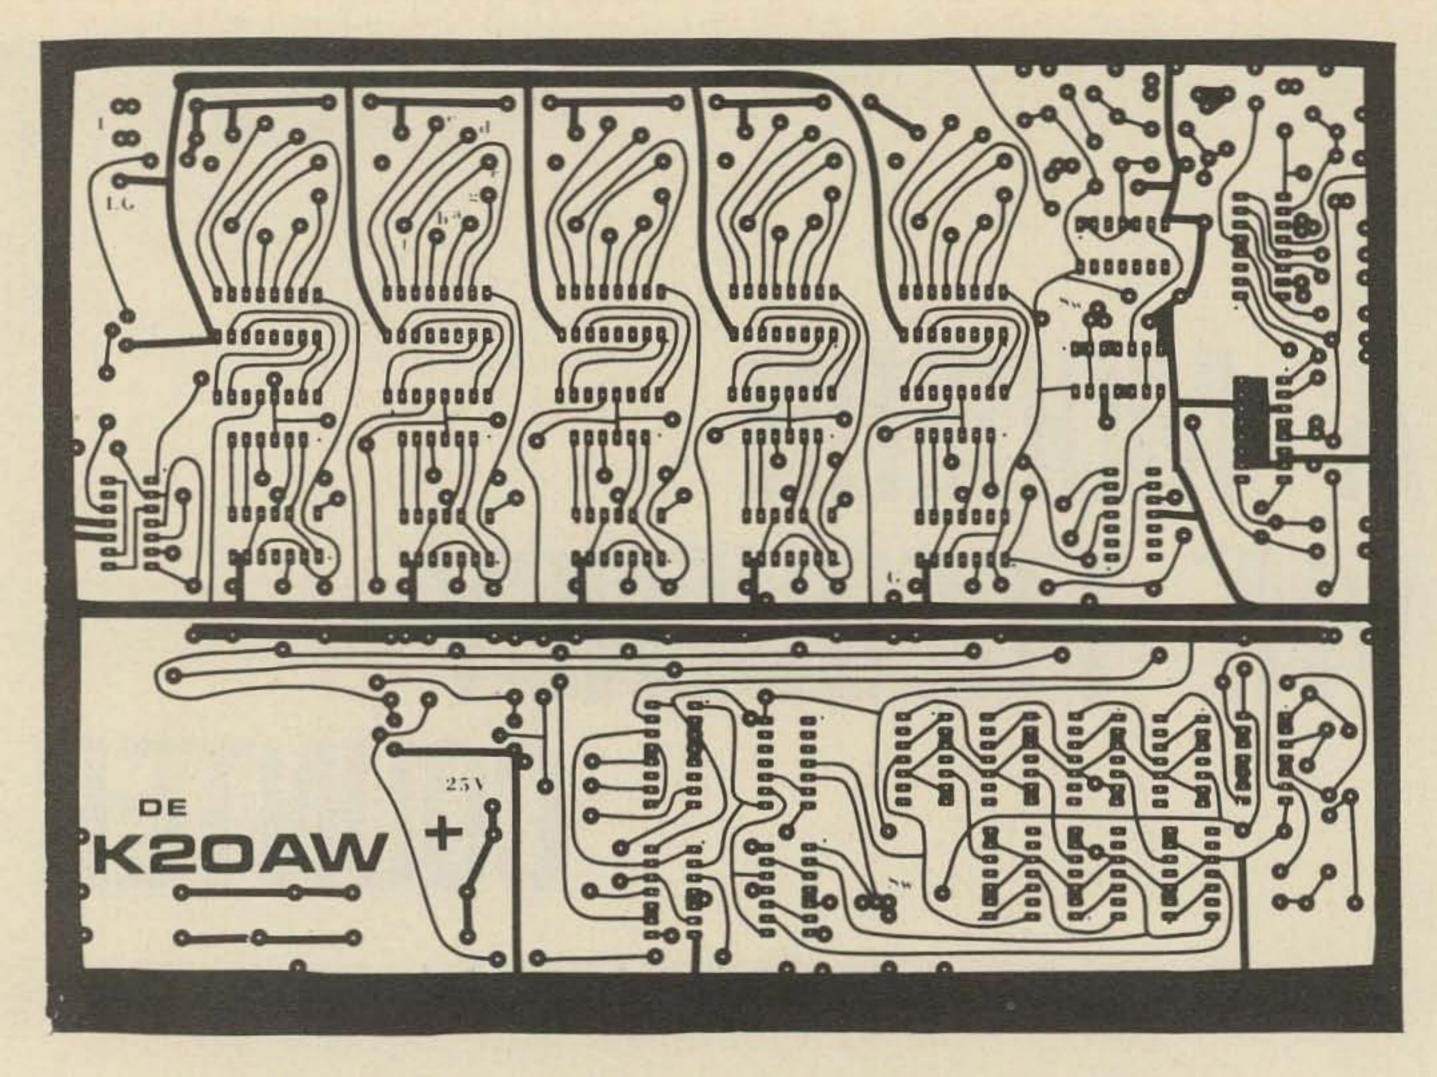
Printed circuit board layout for main board (copper side, 50% actual size).
